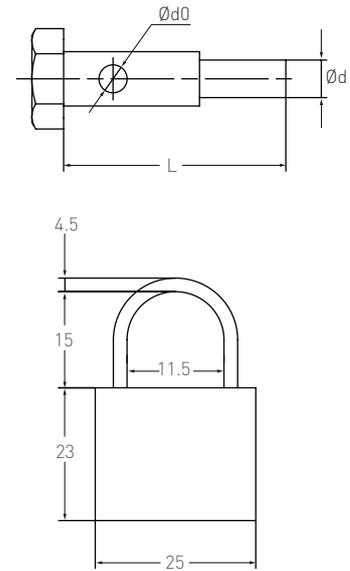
LOCK PIN AND PAD LOCK (mm)
